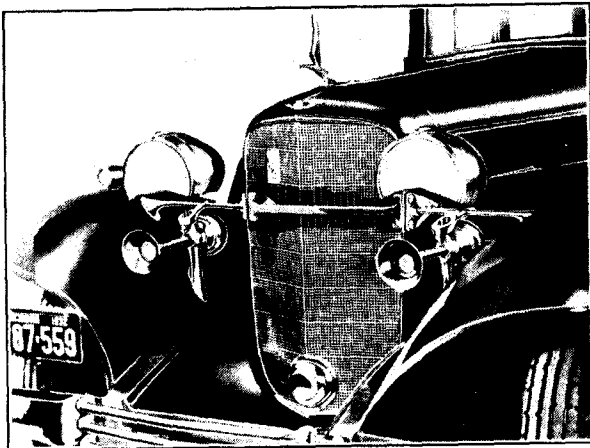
Radiator grille cut away to show casing brace rod assembly to which the fender tie rods are attached
